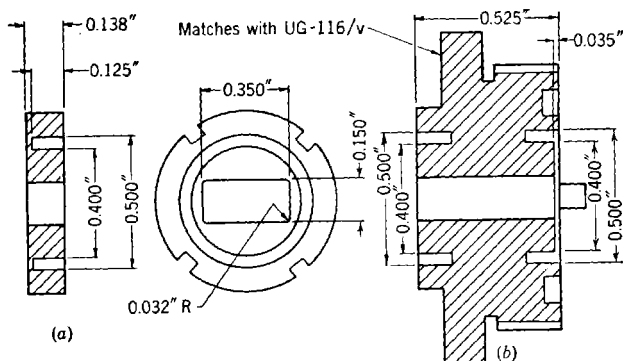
Details of 1-cm vertebrae; (a) is choke disk, (b) end piece.
